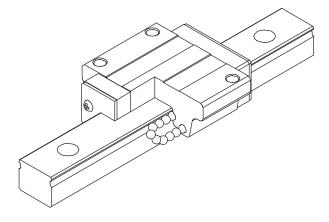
Recirculating linear ball (or roller) bearing, linear guideway, carriage type
